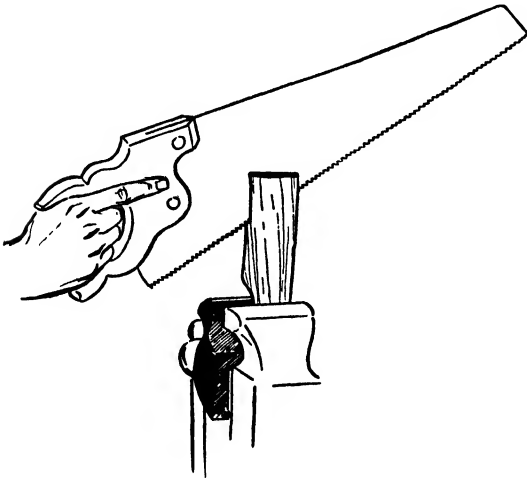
After fitting the end of the handle, rip a kerf for the wedge if a wooden wedge is to be used.
